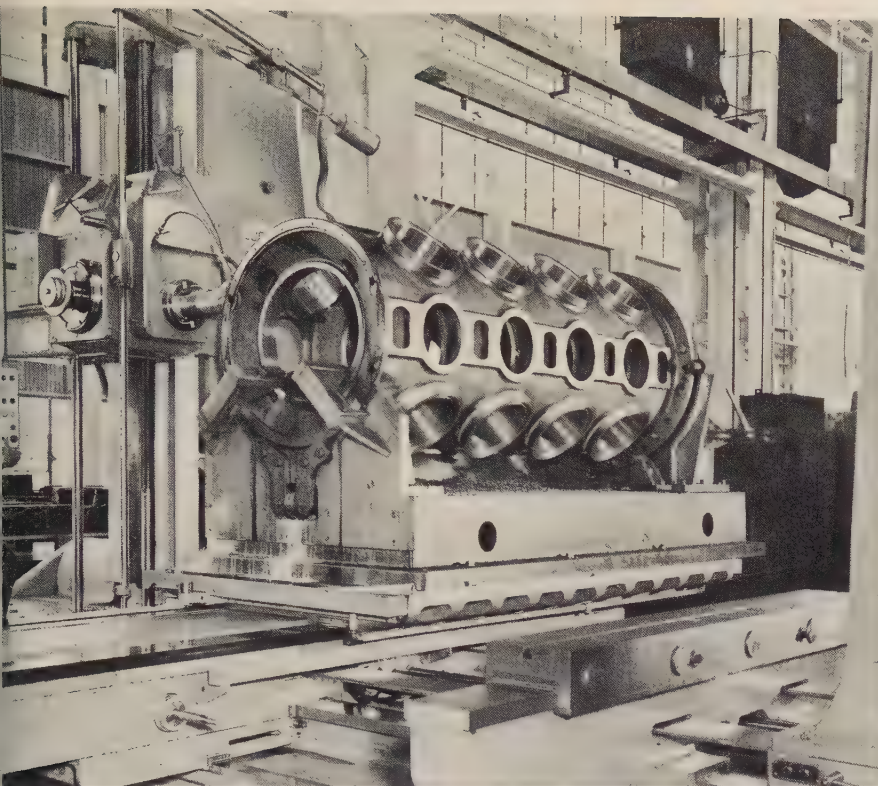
The exterior plane surfaces on the crankcase are milled on a horizontal boring mill.
